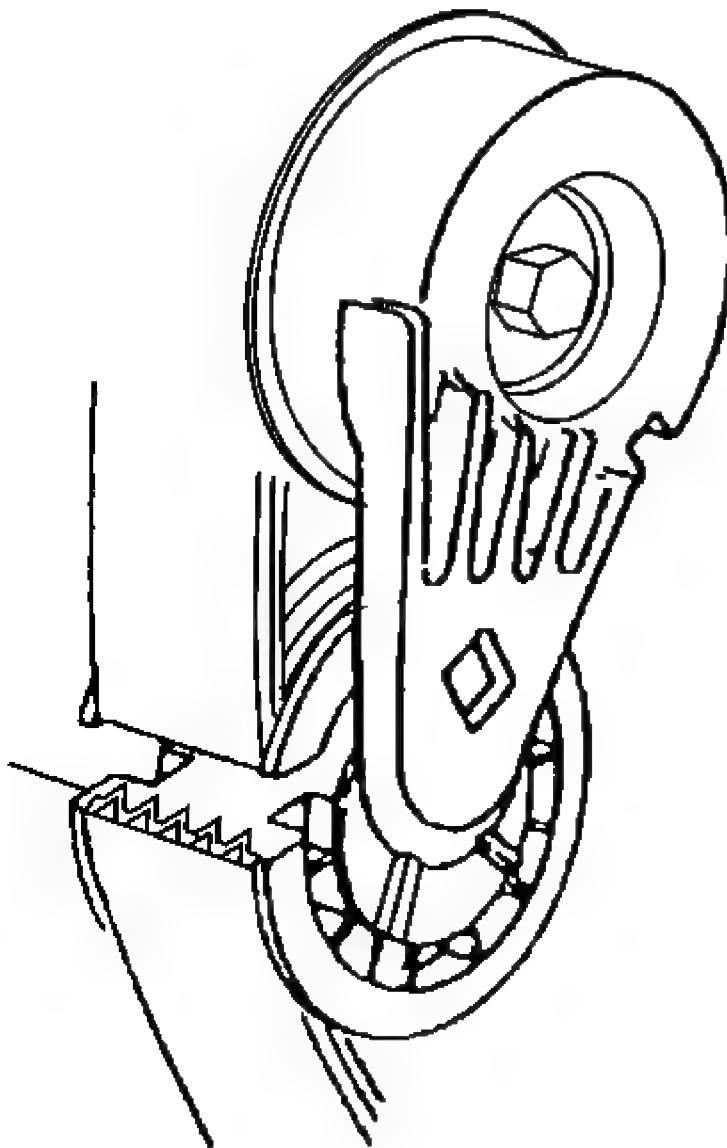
View Of Drive Belt Properly Installed On Pulleys
